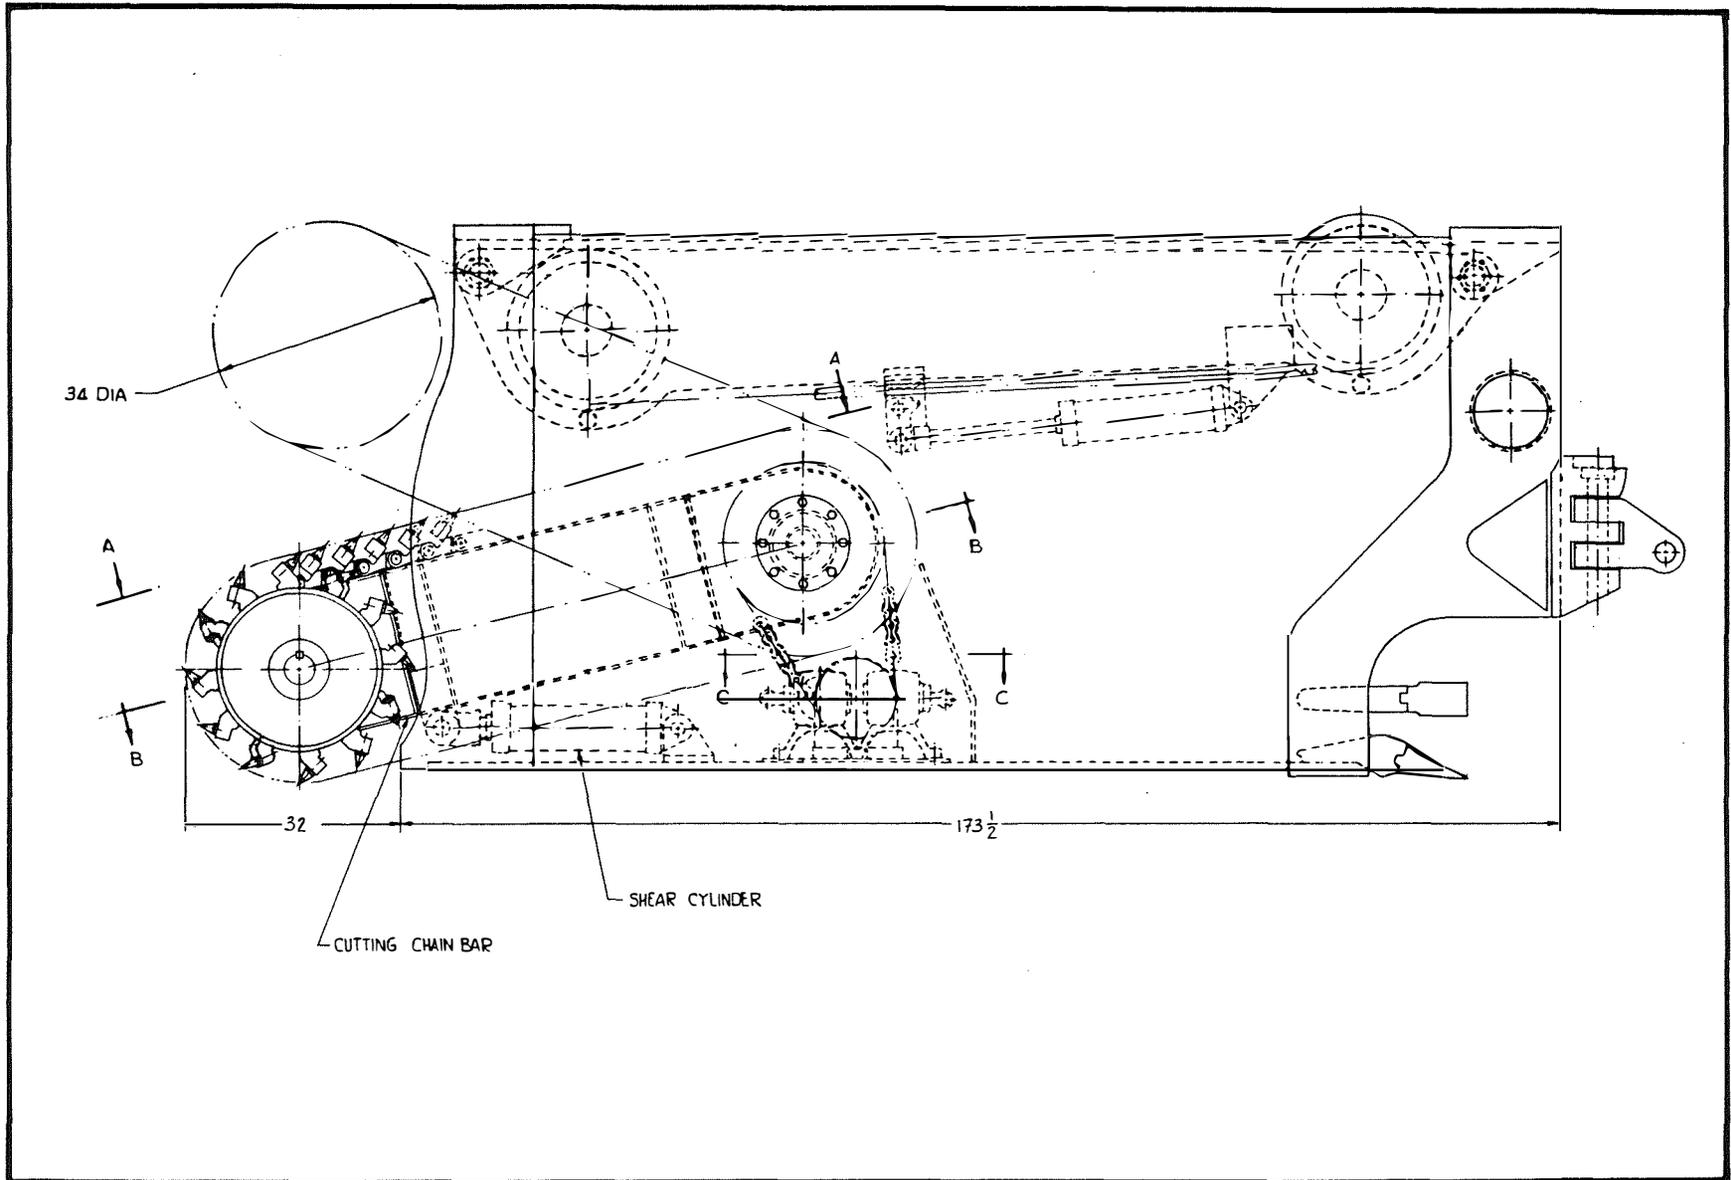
MOTORIZED BUCKET (Sheet 2 of 3)
